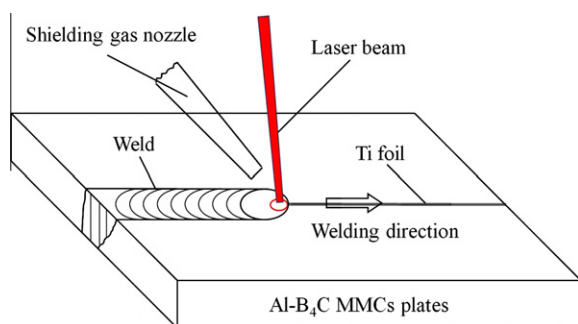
Schematic of laser welding with a Ti filler foil.
